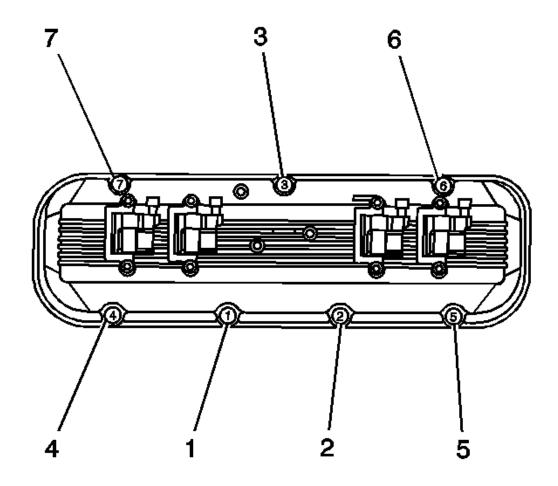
View Of Valve Rocker Arm Cover (Left) Courtesy of GENERAL MOTORS CORP.
